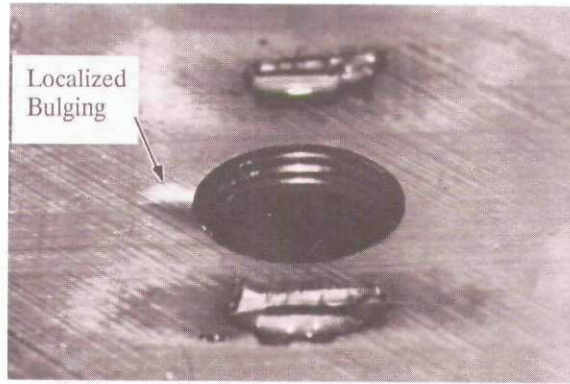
D-sight image of localized bulging of plate surface at hole edge of type B specimen.
